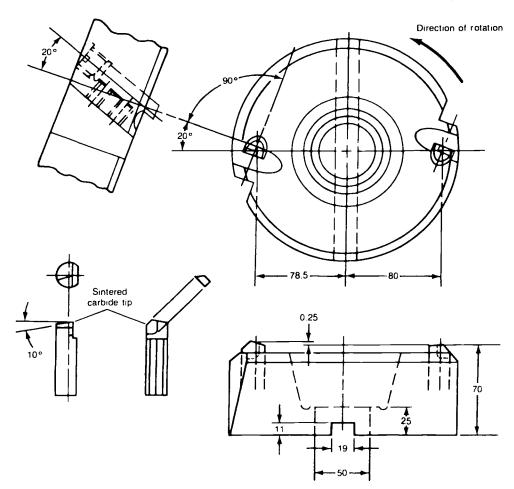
Tool geometry for special two-tooth sintered carbide-tip milling cutter used to cut aluminum alloys. Dimensions given in millimeters. Source: Ref 4
